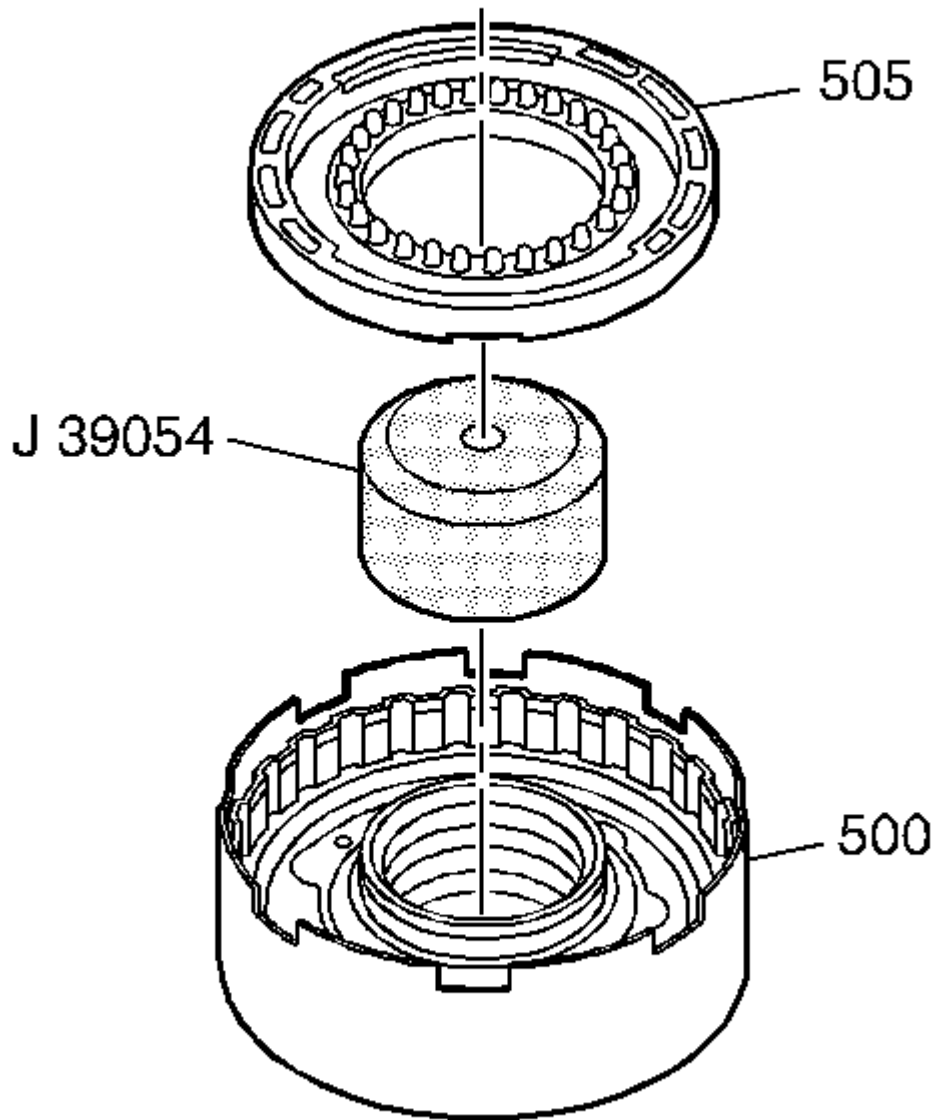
Reverse Clutch Piston, Housing & Seal Protector
